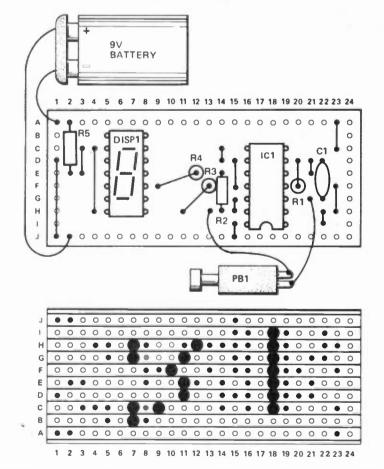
Veroboard layout of the project, showing component locations and track breaks underneath the board
